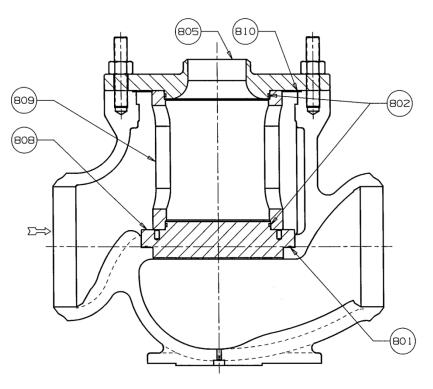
INLET BLOW DOWN ASSEMBLY
